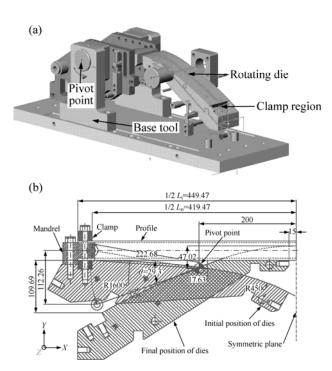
Exploded view of rotary stretch forming tool (a) and details of left semi die (b)
